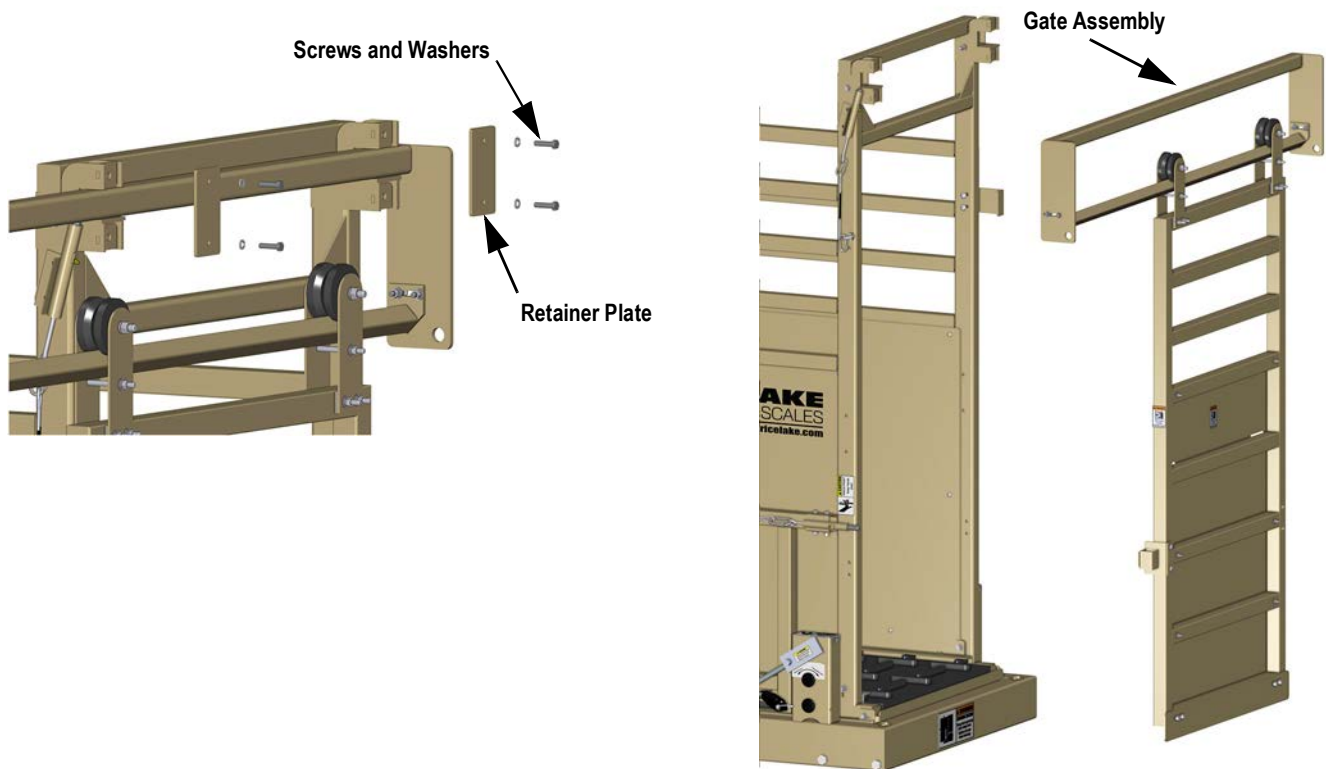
Remove Slide Gate with Gate Slide Weldment
